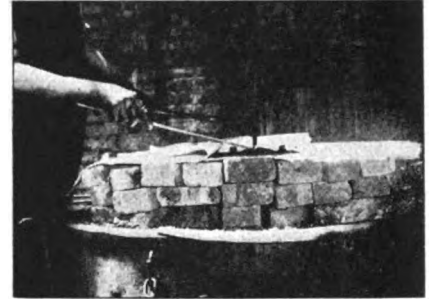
PREHEATING OVEN OF FIRE BRICK, WELDING IN PROCESS
